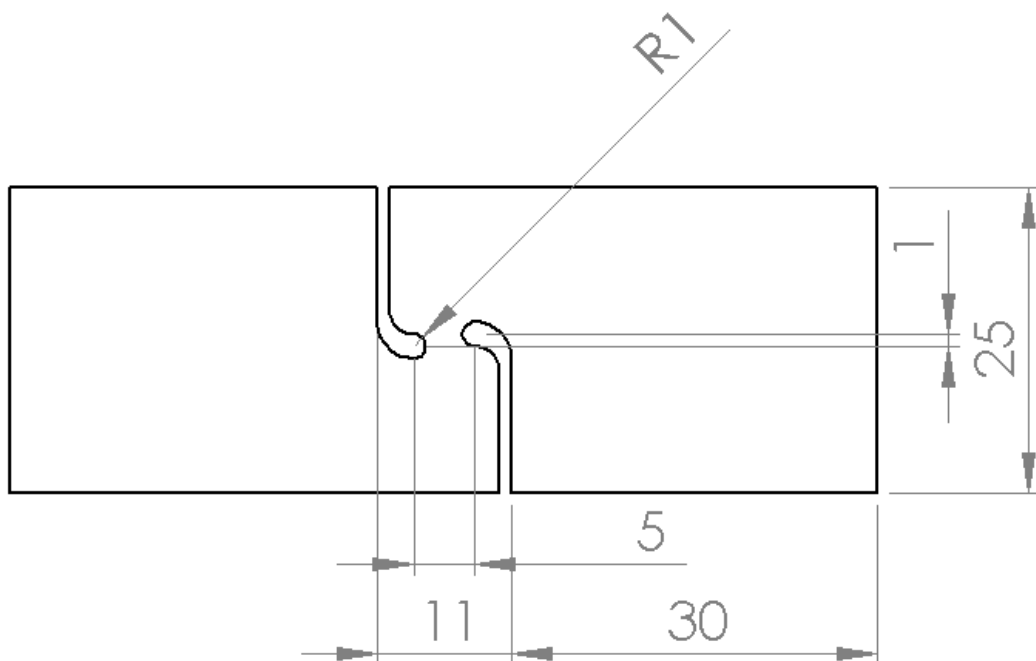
Technical drawing of a Peirs specimen for split Hopkinson bar high strain rate shear fracture
